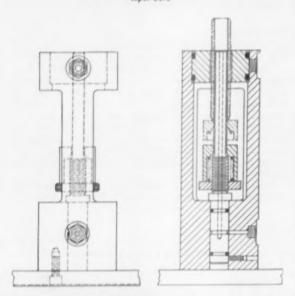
Gauging fixture for the bore and outside diameter of a valve guide
